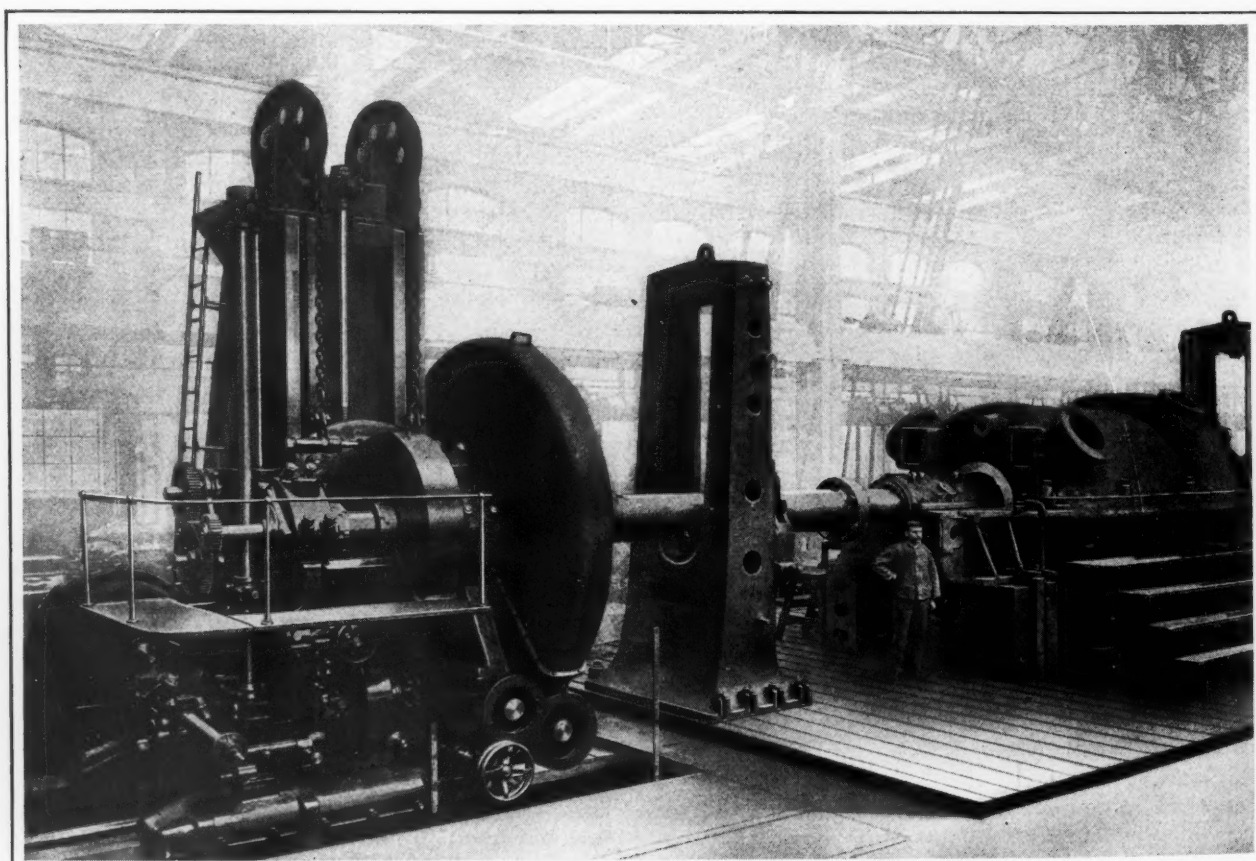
Cylinder Boring Machine Set up for Boring Turbine Casing
